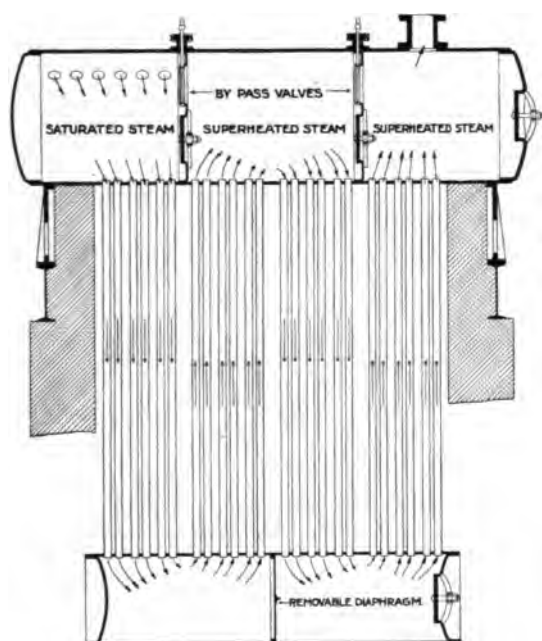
SECTION THROUGH STIRLING SUPERHEATER, SHOWING PATH OF STEAM
